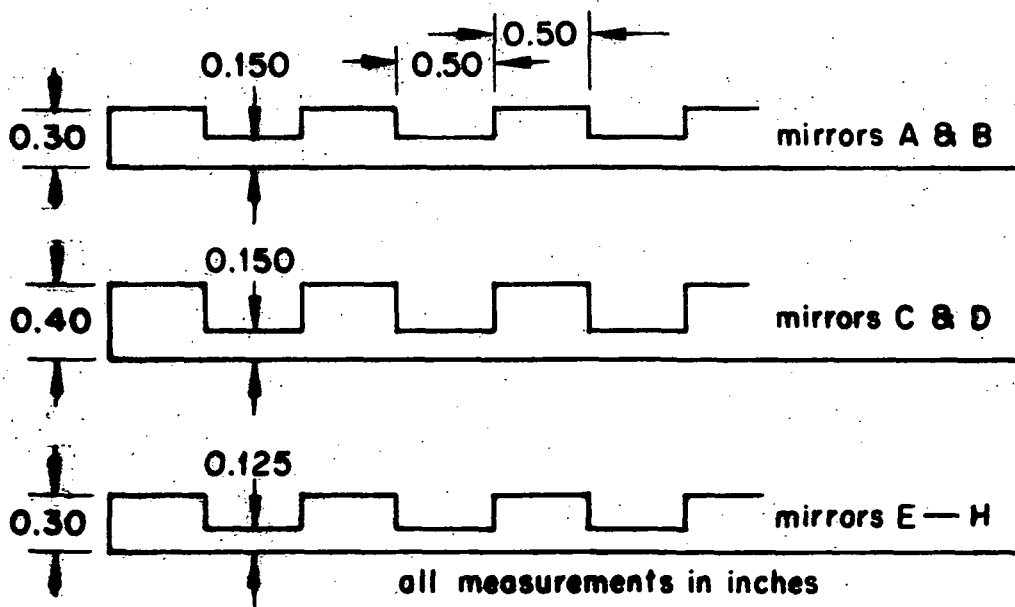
Cross sectional view of the various Be blanks used in fabricating the Aerobee 17.08 mirrors. The dimensions are given in inches.
